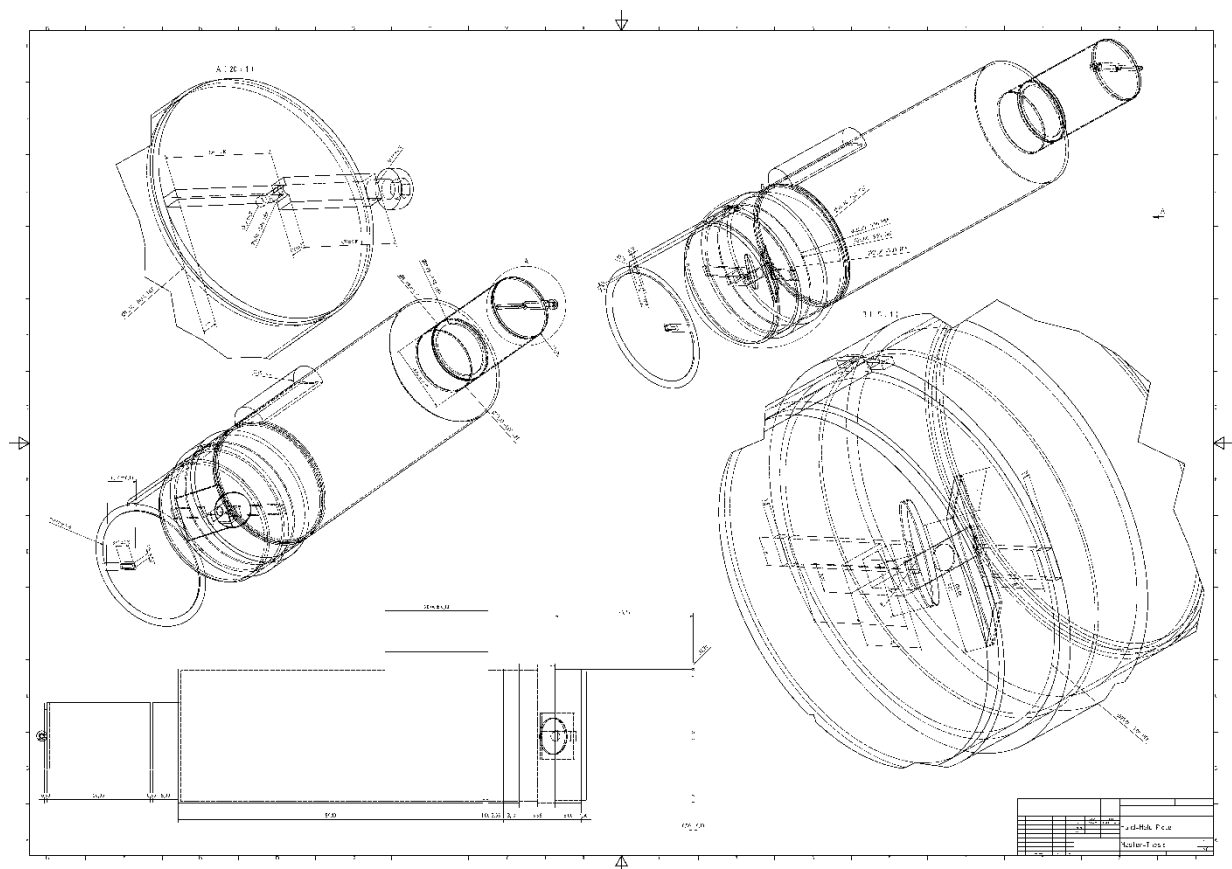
Technical drawing of the Hand-Held Piece (ISO-Norm). Overall length: 126.16 mm, Overall width: 30.25 mm
